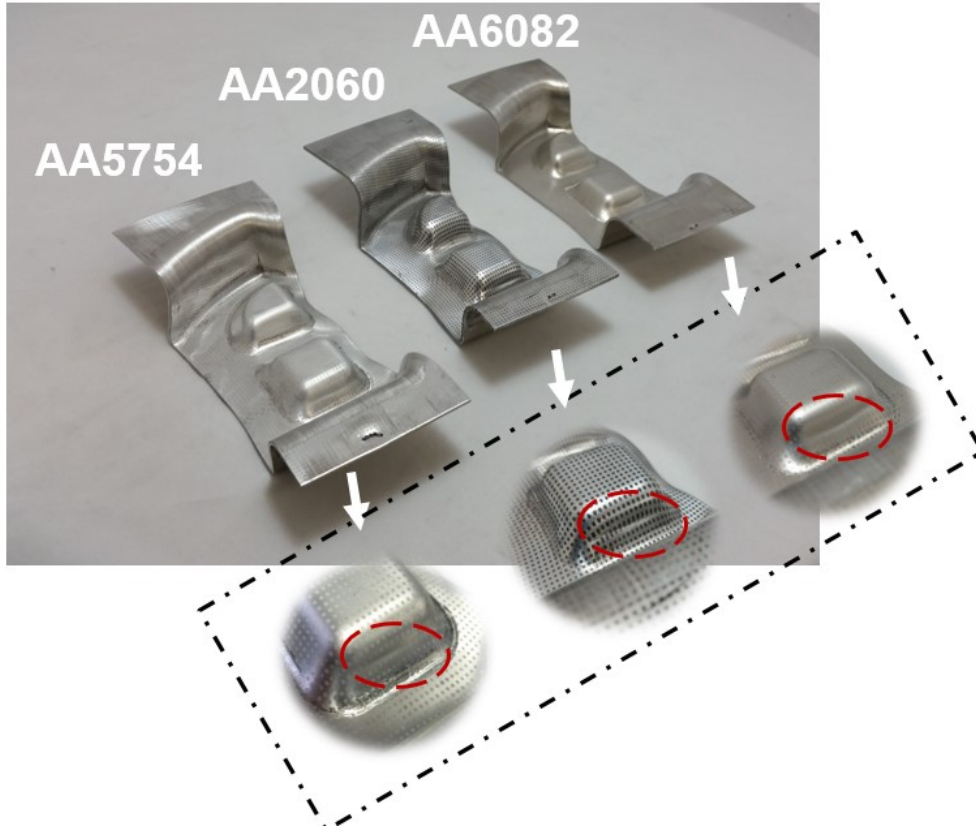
shows the failure positions of formed wing stiffener component on AA5754 (Left), AA2060 (middle) and AA6082 (Right) alloys under the hot stamping conditions with different forming strokes.
